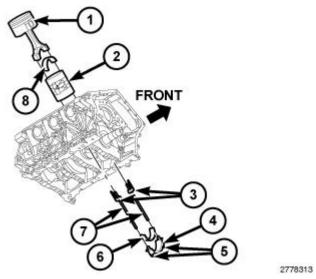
Piston, Connecting Rod Cap, Bolts, Plastic Guide Plates & Guide Pins Courtesy of CHRYSLER GROUP, LLC
